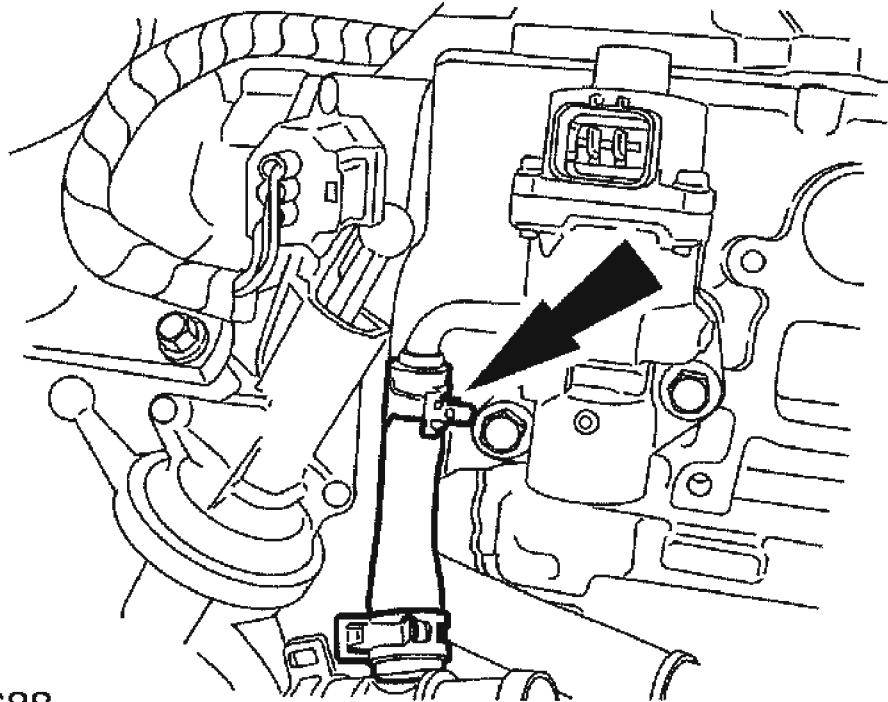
Removing Bolts, Coolant Bypass And Gasket
